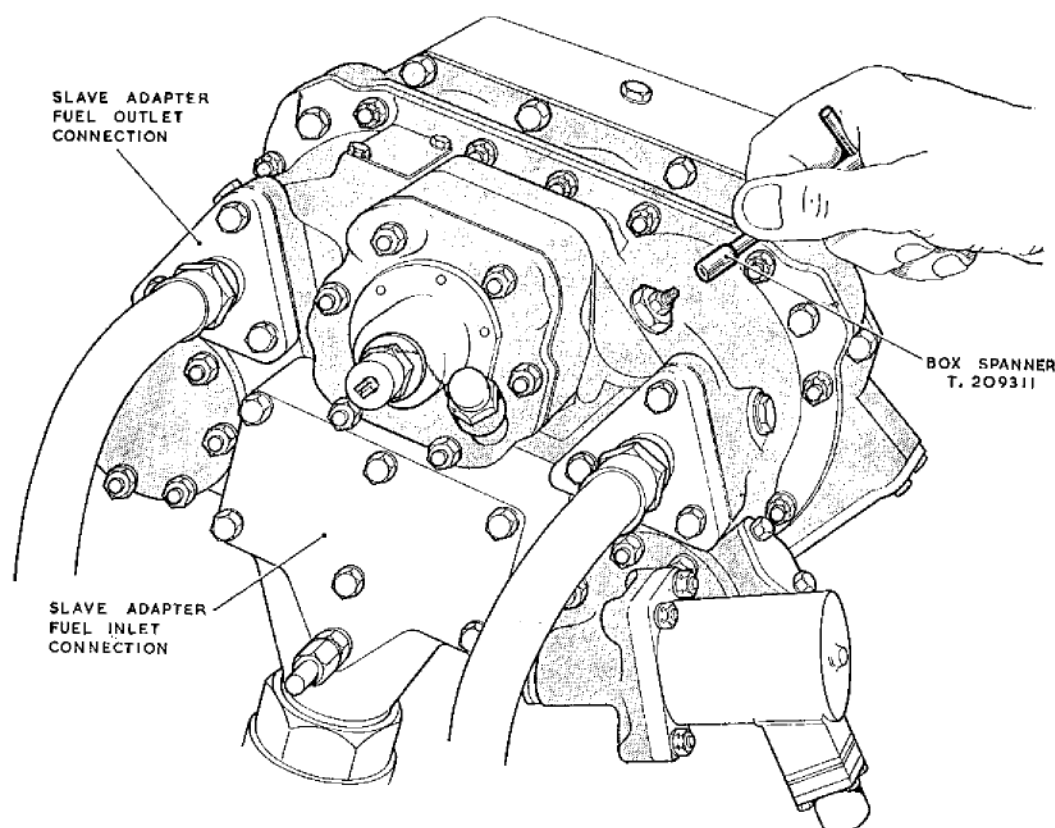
Test rig adapters, and adjusting centrifugal make-up valve
